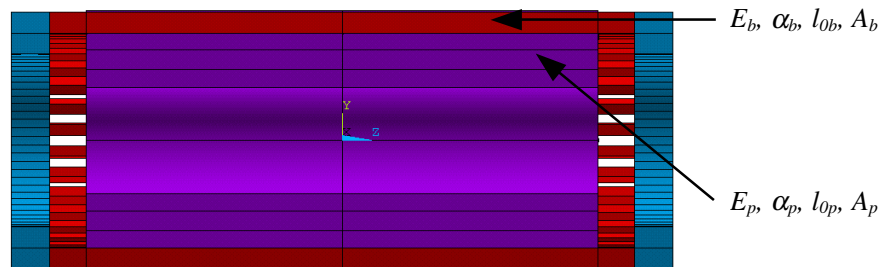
Cross section of a squirrel cage induction motor rotor core.
